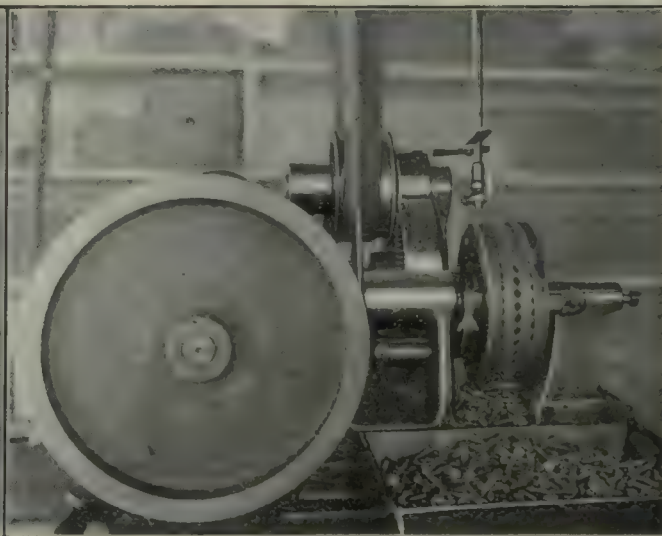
SLOTTING FIXTURE FOR SCREWS
